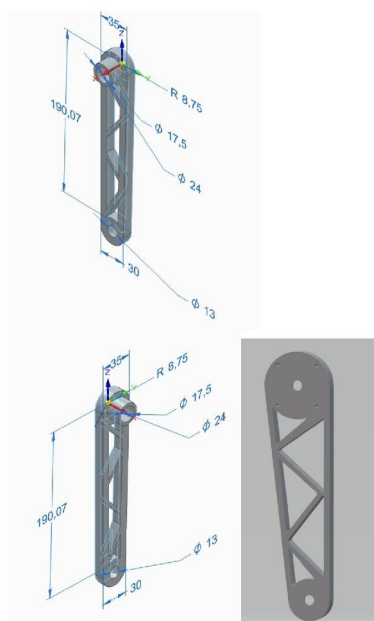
Multiple CAD orientations of the tibia link illustrating the torsional spring bore (Ø 24 mm) and wheel axle hole (Ø 13 mm).
